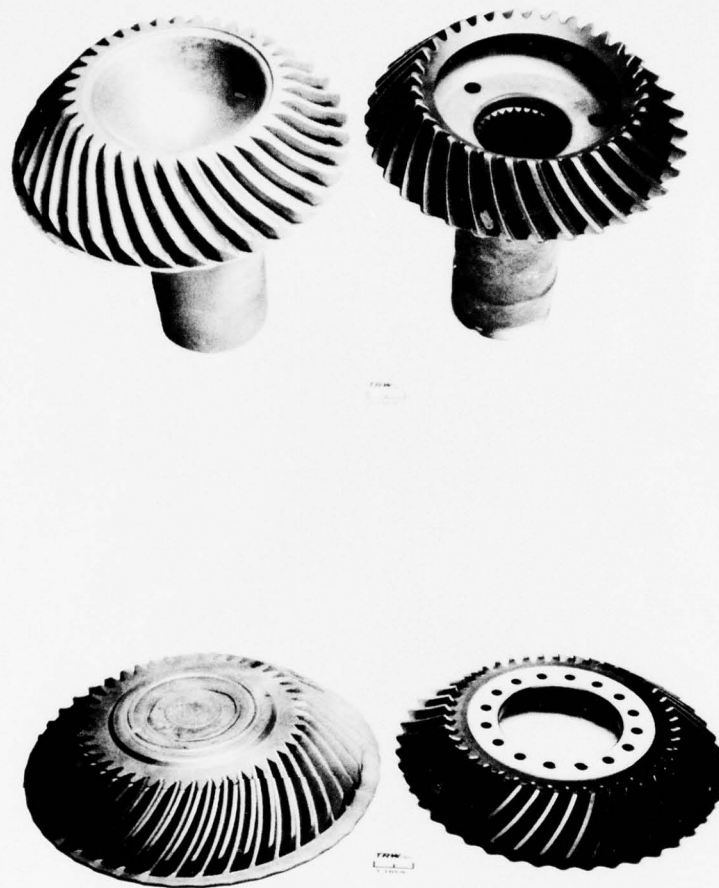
Spiral Bevel Gear Set. Top: As-Forged Gear, Left; Finished Gear. Bottom: As-Forged Pinion, Left; Finished Pinion.
